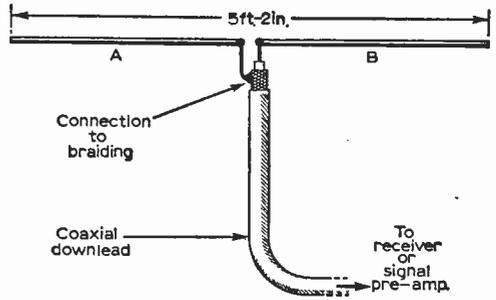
The dimensions and connections of a v.h.f./f.m. dipole.
